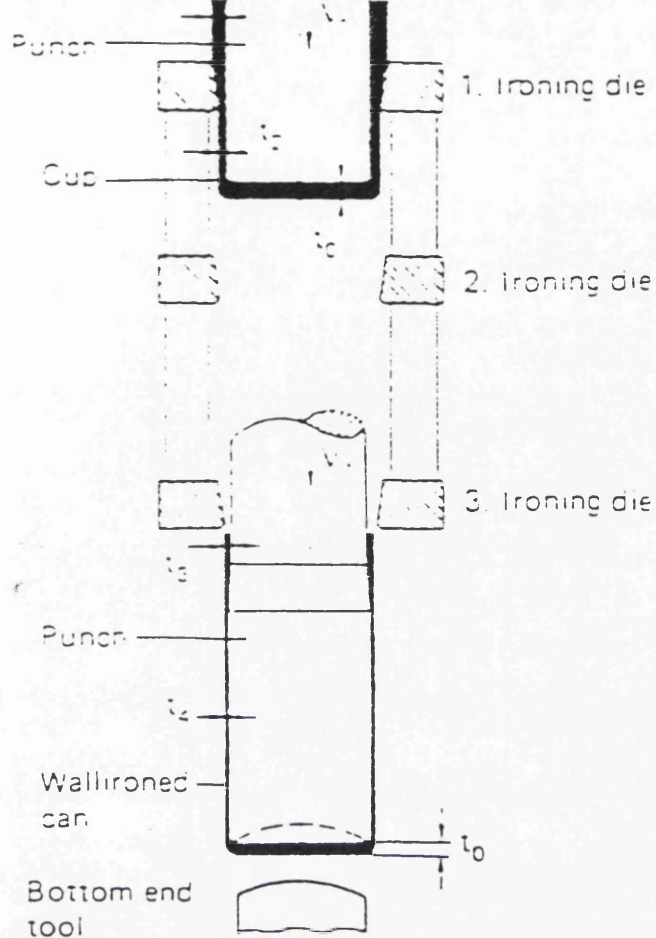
Schematic diagram of redraw tooling and ironing dies used for DWI can manufacture
